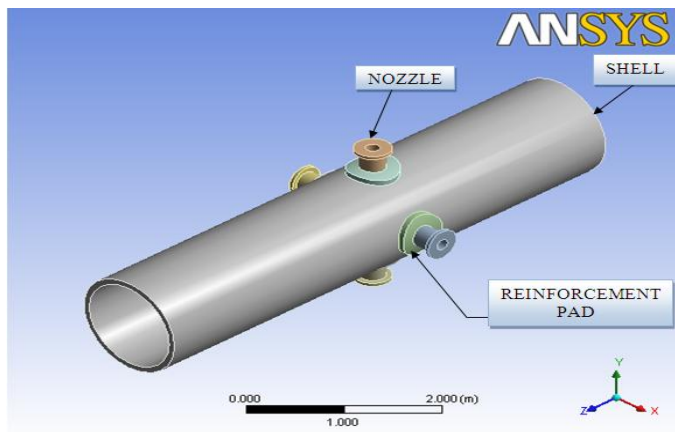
Nozzle, Reinforcement pad & shell assembly with parts
